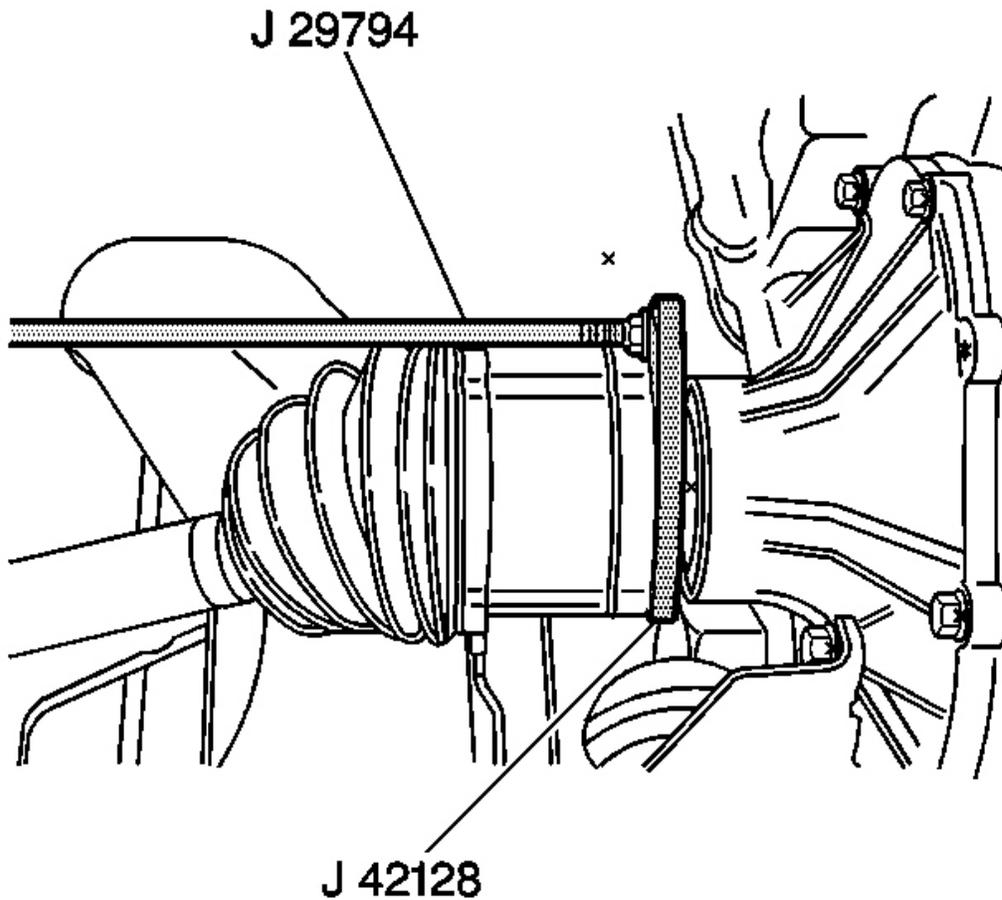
Rear Beveled Surface At Drive Shaft Inner Joint Housing
